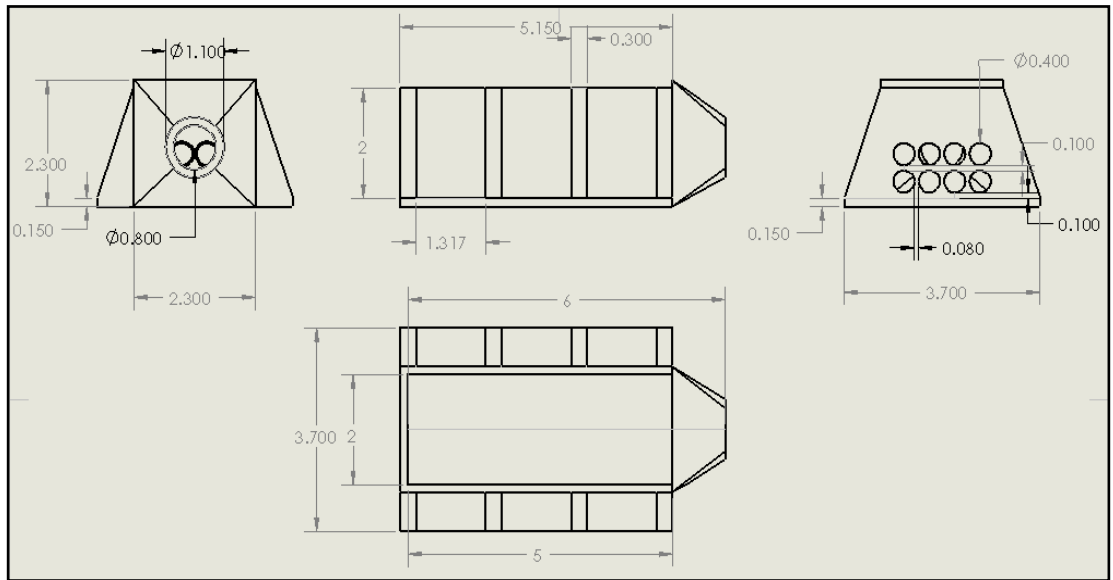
Double Tank Circular Diffuser Design 2D view (Tank 2)
